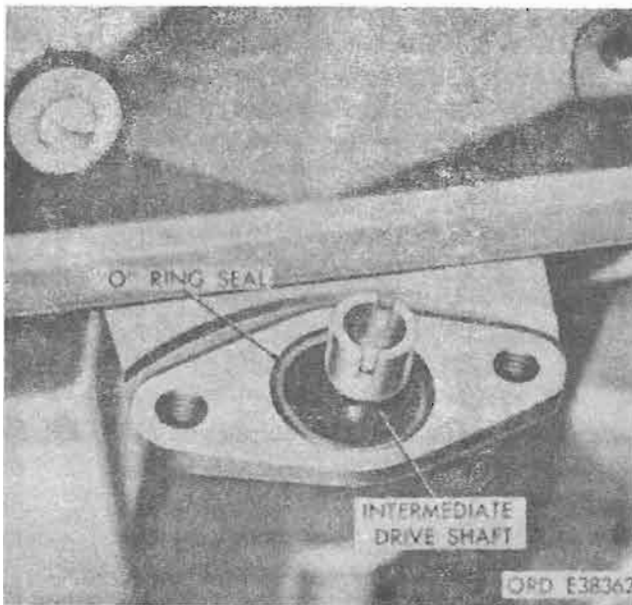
Distributor intermediate drive shaft and O-ring seal.
